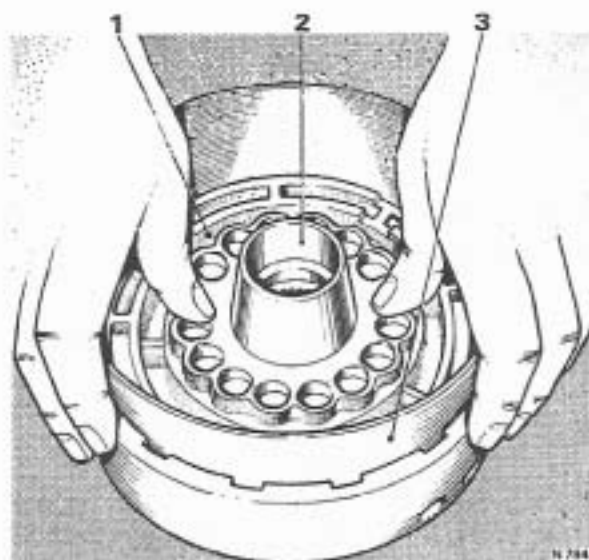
FITTING THE FORWARD CLUTCH PISTON
